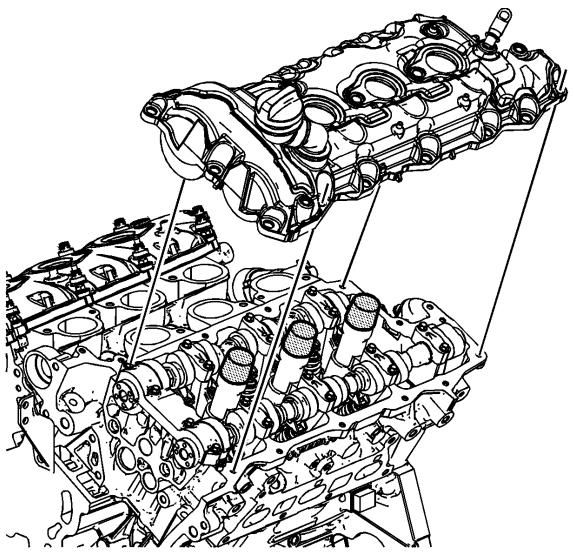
View of Camshaft Cover & Cylinder Head Courtesy of GENERAL MOTORS COMPANY
